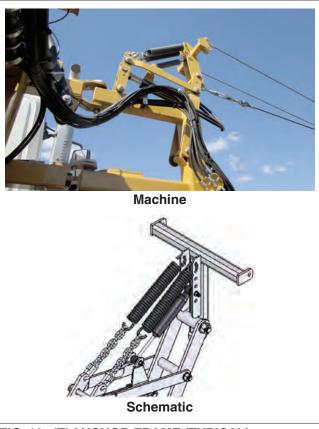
'T' ANCHOR FRAME (TYPICAL)
